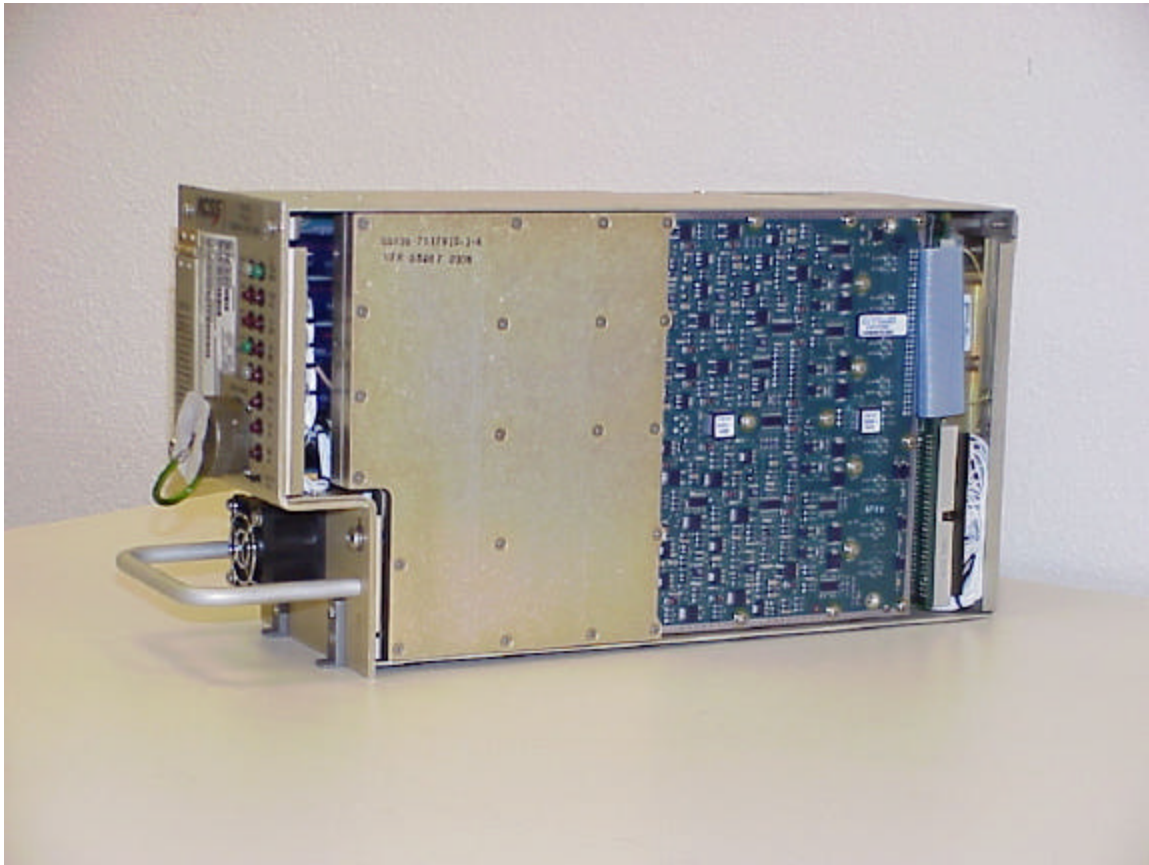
View of Unit Side, Showing A5 Receiver - I/O Assembly with Shield
